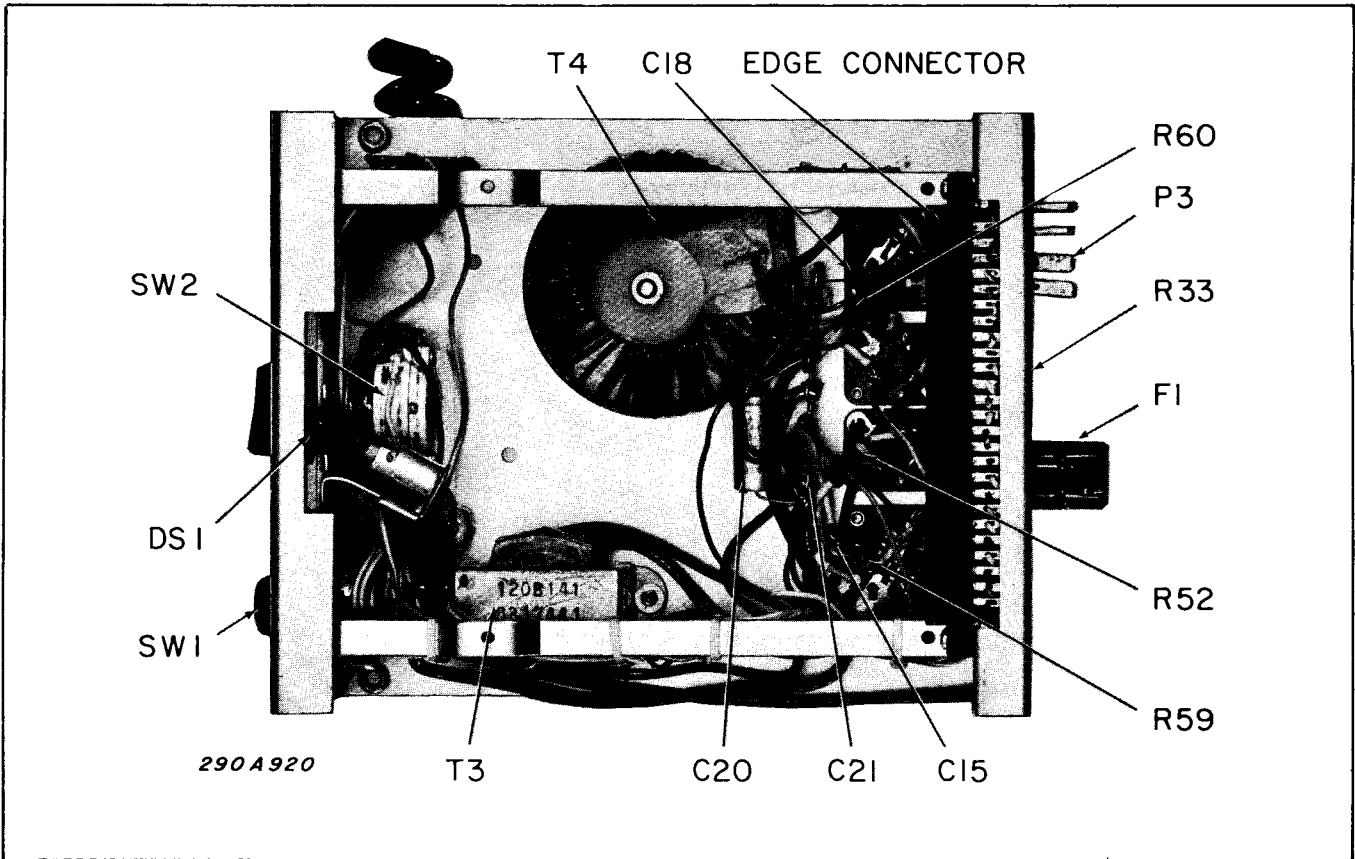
PA 150 Top View, Circuit Board Removed.
